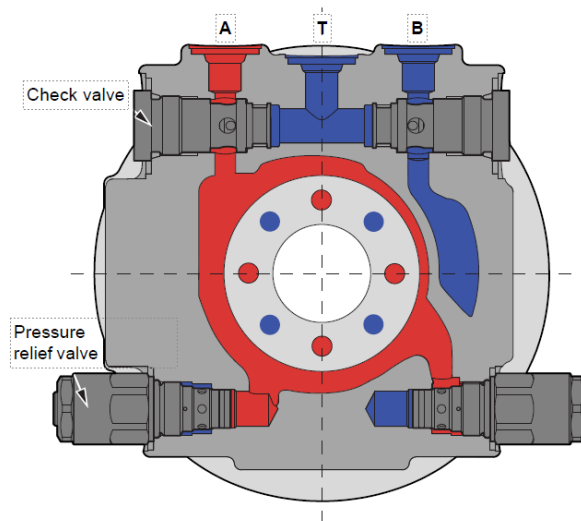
Pressure relief valves and anti-cavitation check valves of the hydraulic motor
